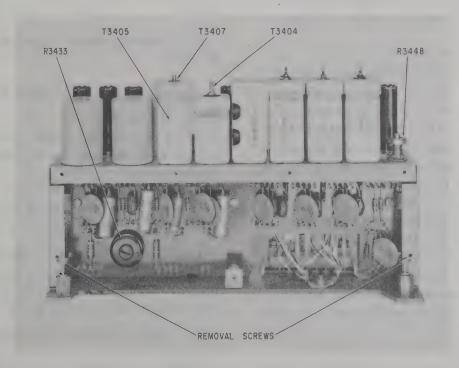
Discriminator Subassembly, Left Side View, Adjustment Locations
